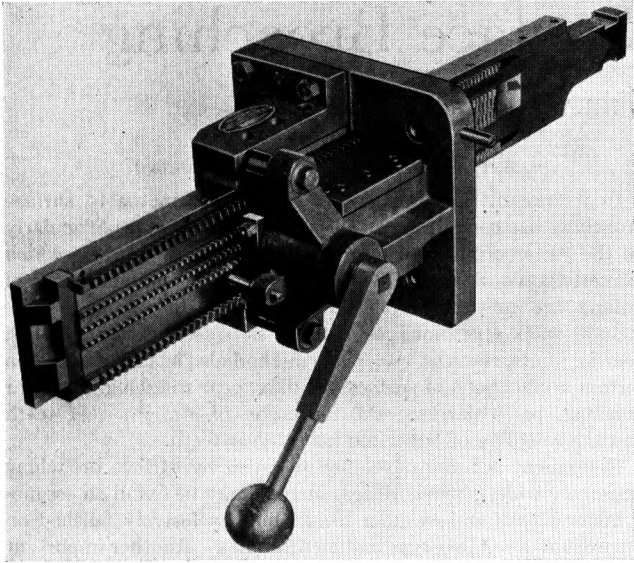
INSERT-TYPE BROACH WITH SIMPLE, QUICK-ACTING FIXTURE FOR USE IN A HORIZONTAL-TYPE BROACHING MACHINE
